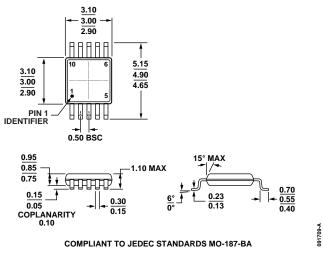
10-Lead Mini Small Outline Package [MSOP] (RM-10) Dimensions shown in millimeters
